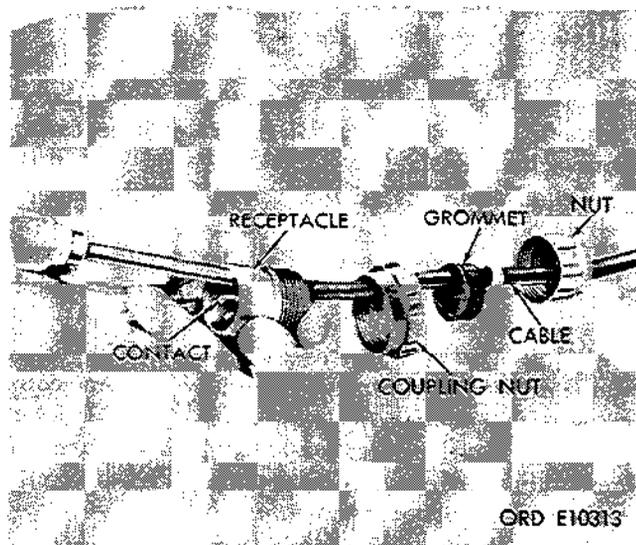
Unscrew coupling nut and push contact out of receptacle.
